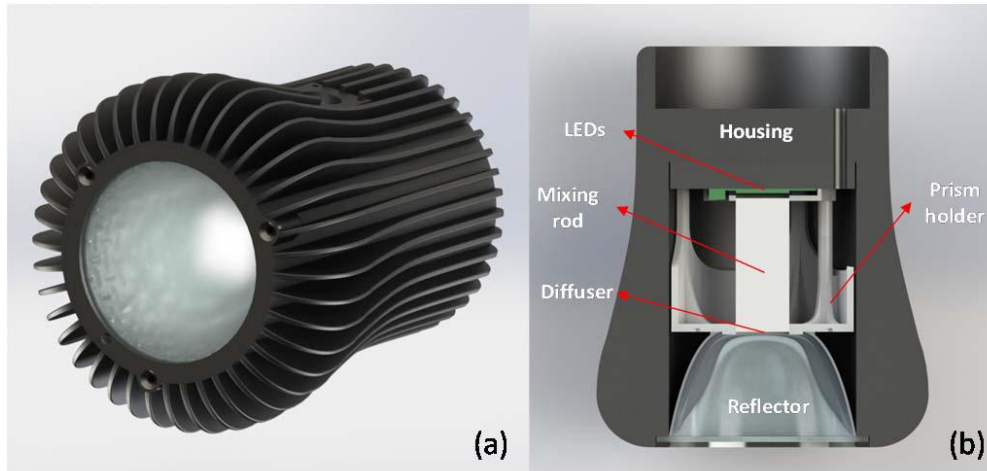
Render of the mechanical design of the lamp housing for the spotlight luminaire. (a) Fully assembled and (b) cross-section with main components.
